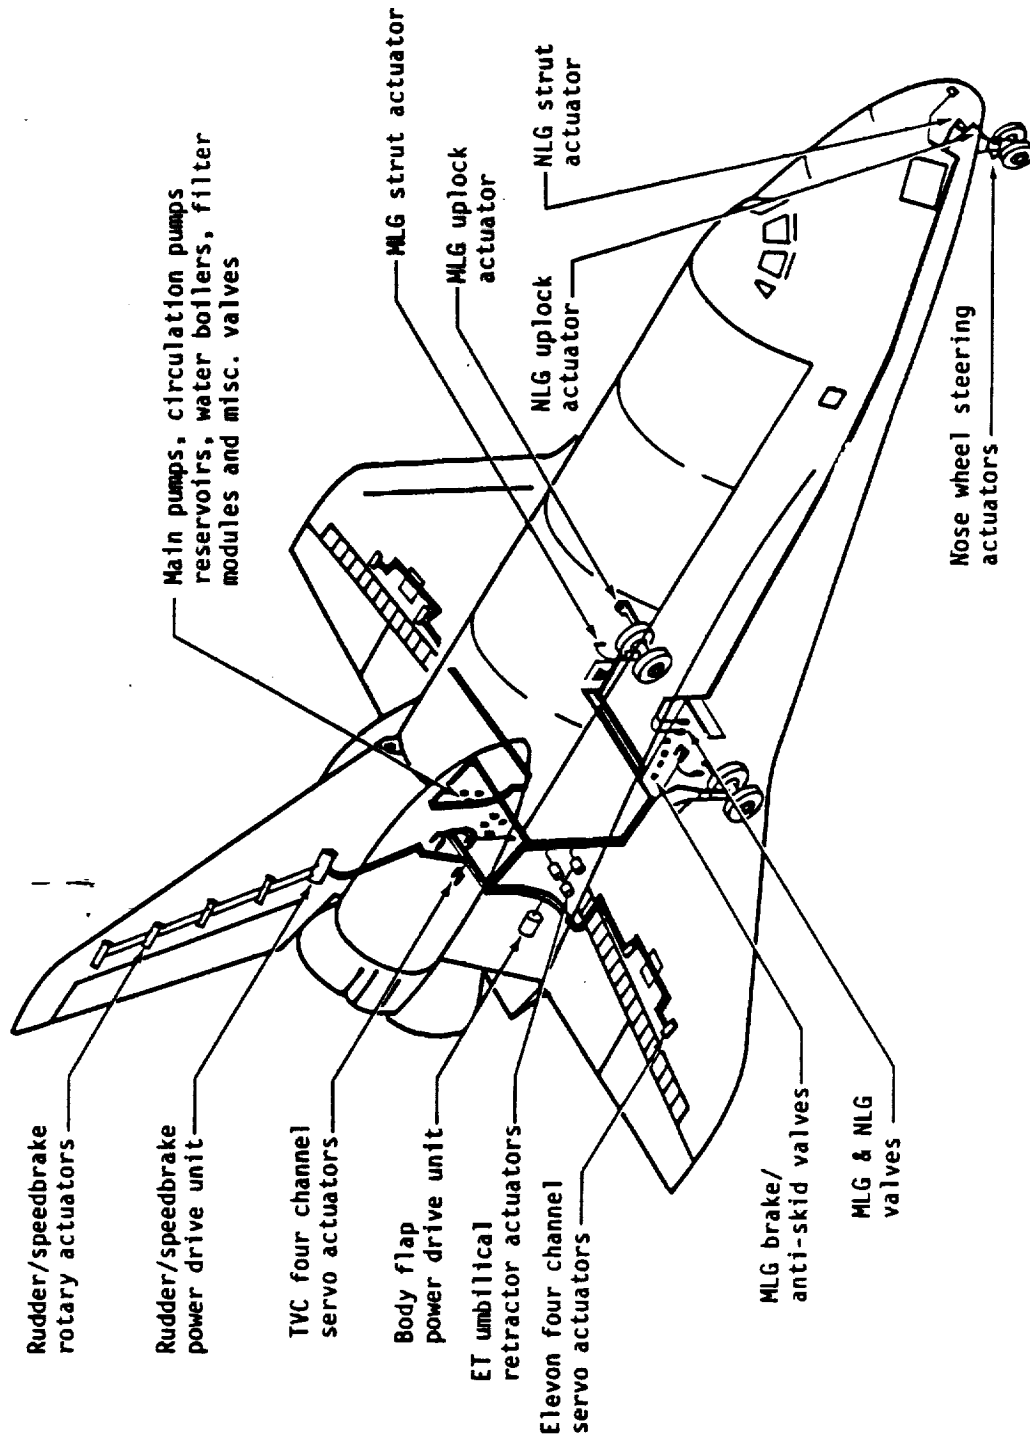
HYDRAULICS AND WATER SPRAY BOILER COMPONENT LOCATIONS
